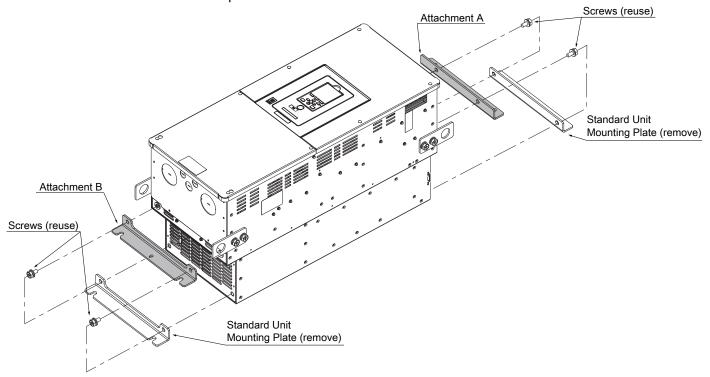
Remove Mounting Plates and Attach Attachments A and B
